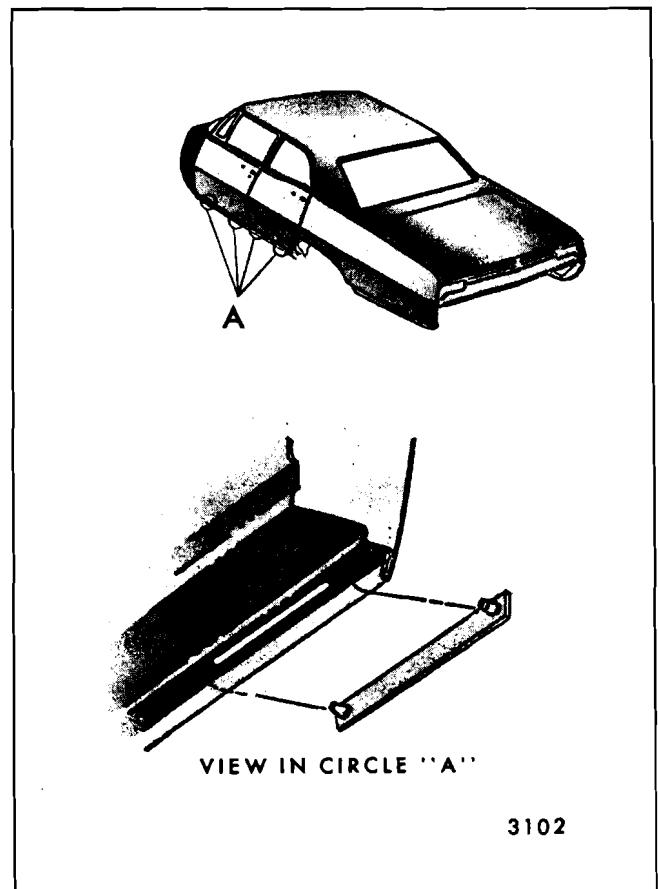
Door Bottom Drain Hole Sealing Strips
